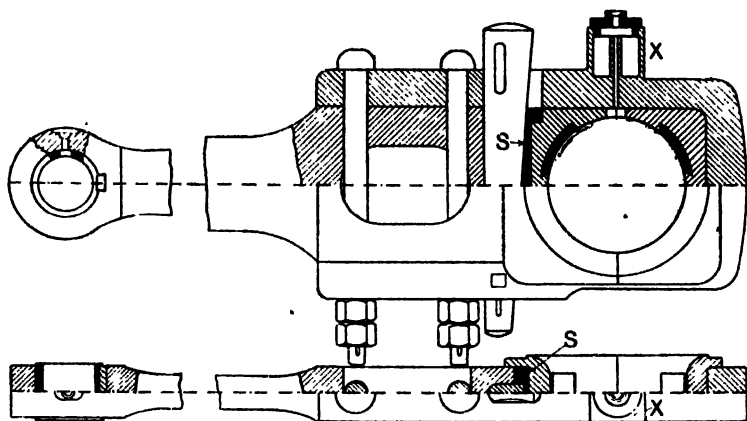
Locomotive connecting rod. (G.E.R.)
